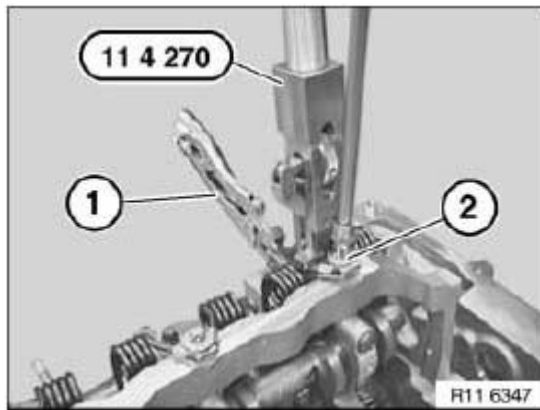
Identifying Special Tool (11 4 270) And Steel Screw
